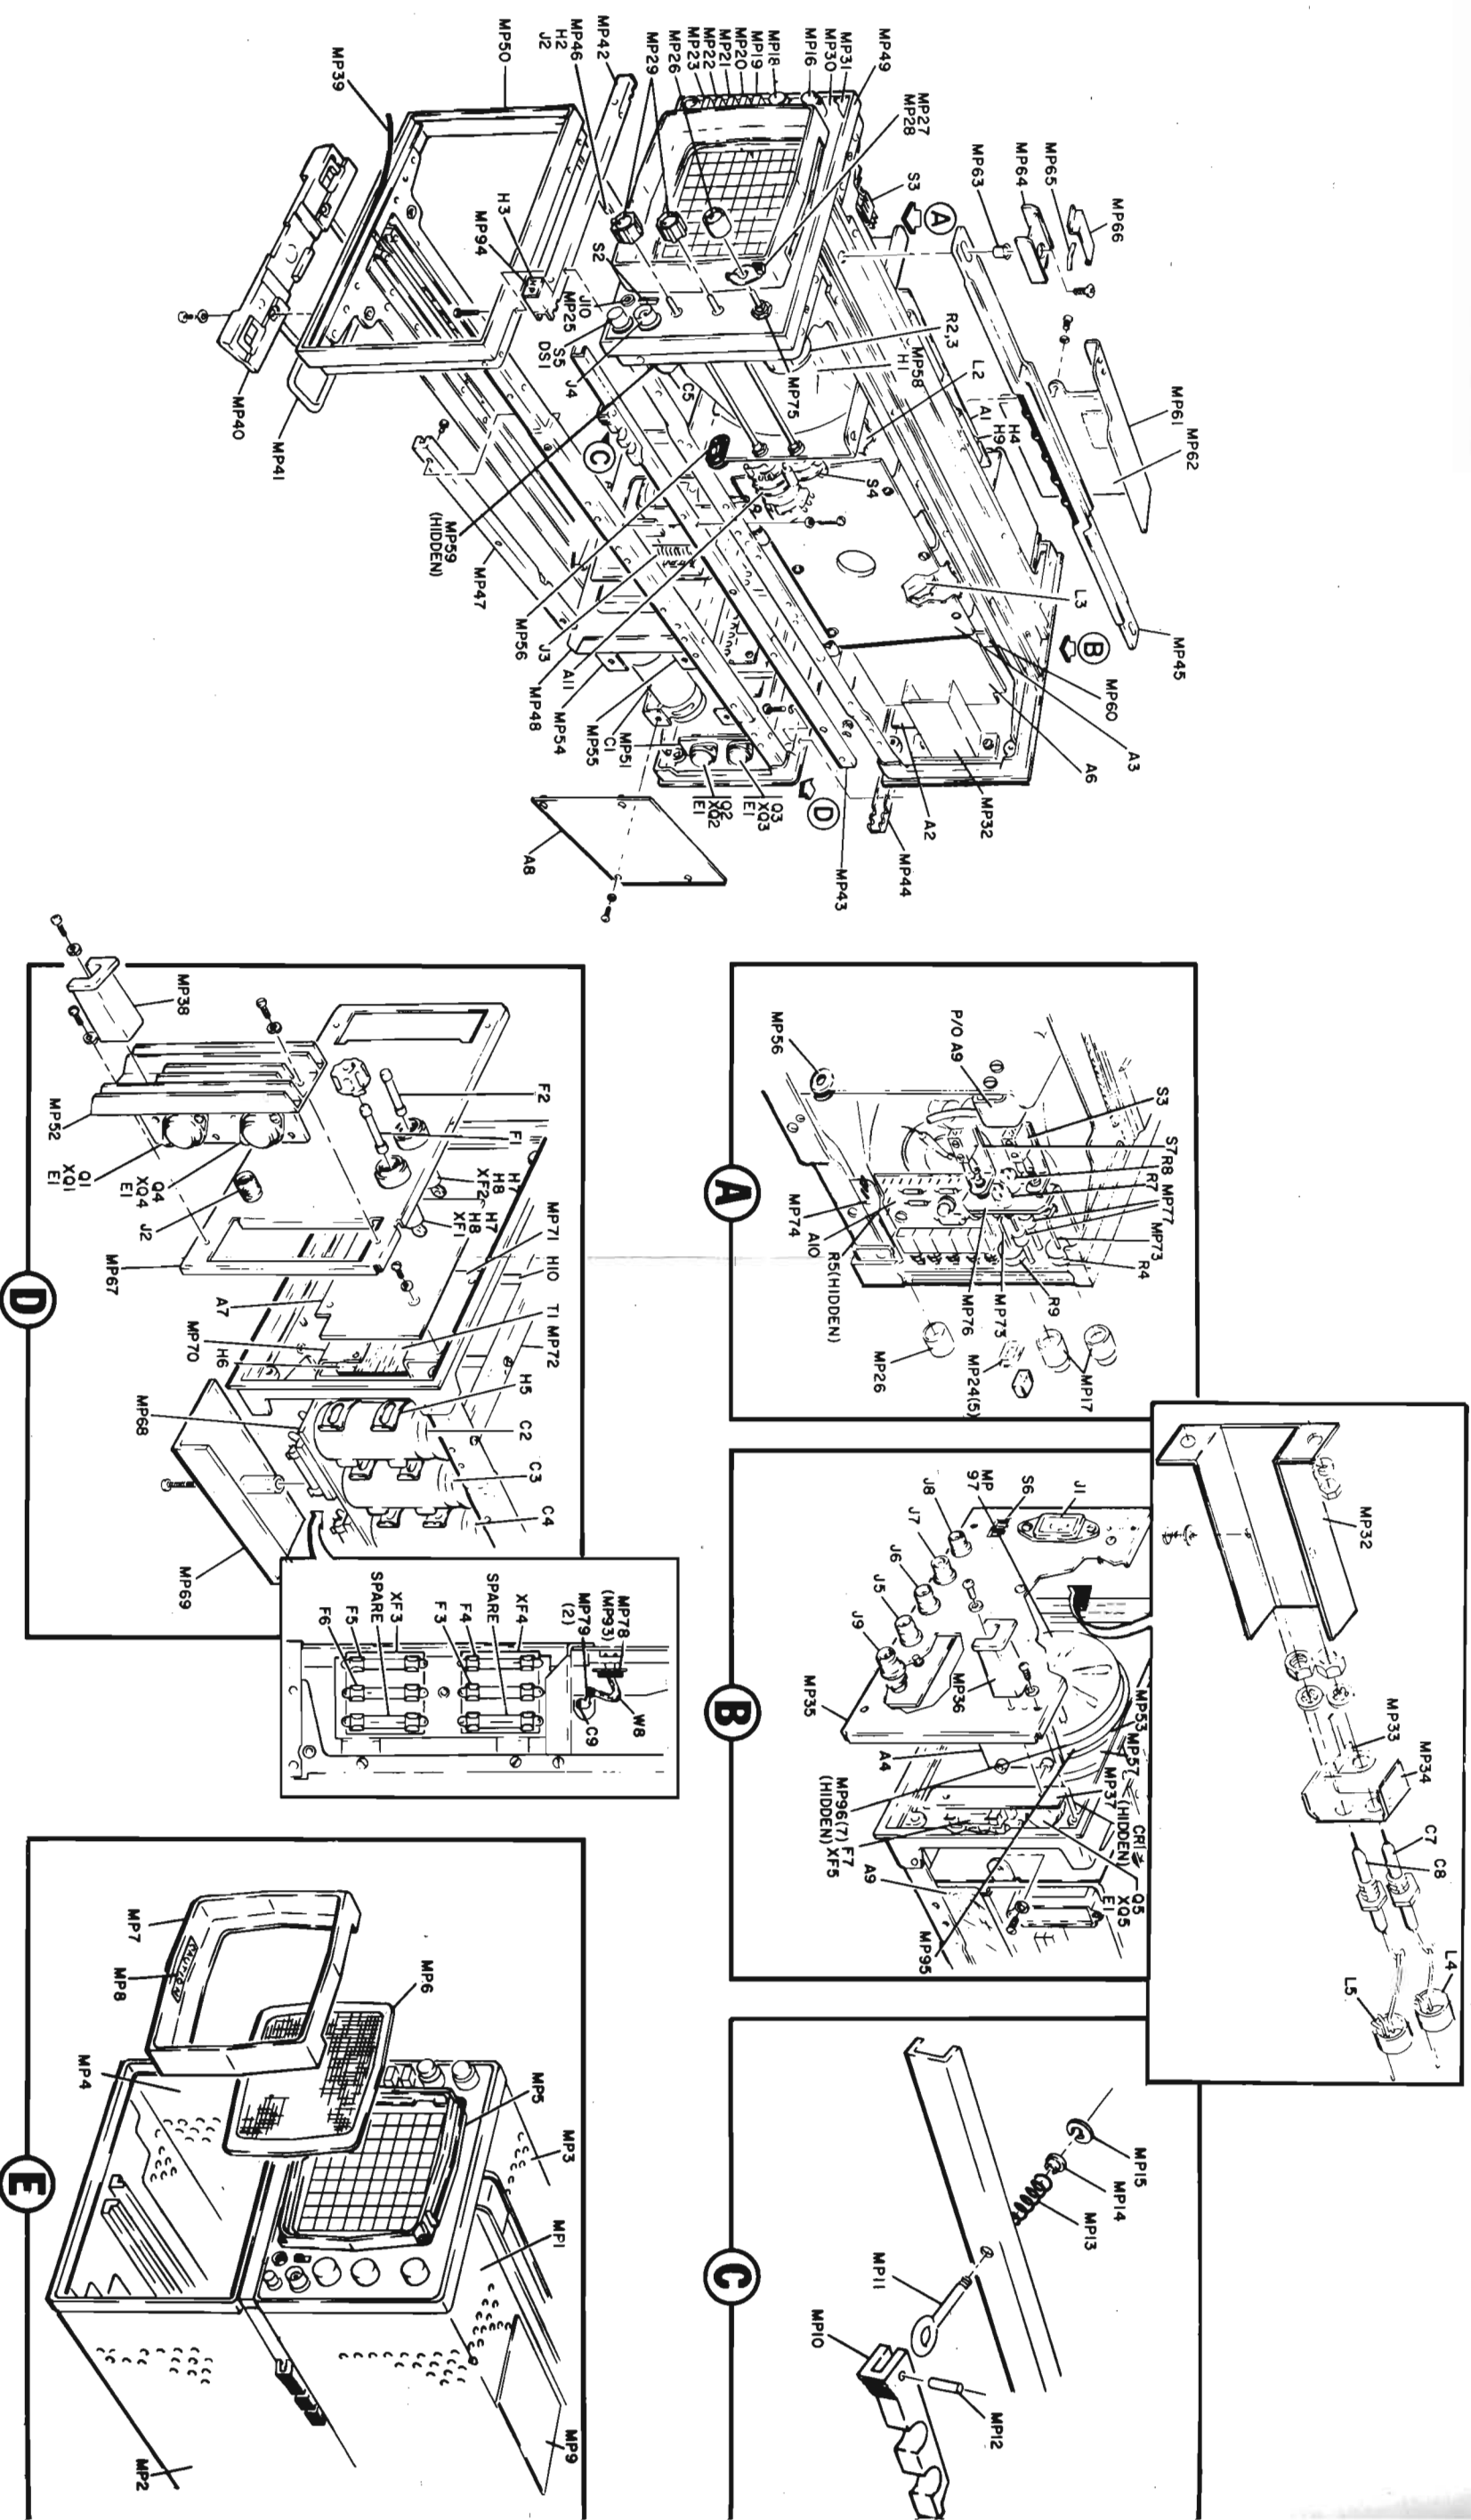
Model 181T/7R Mechanical Parts Identification
